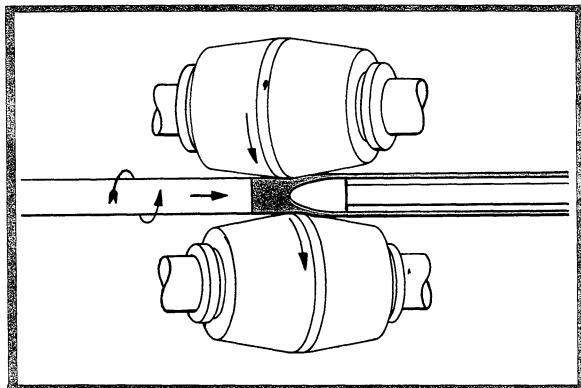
Piercing a steel billet to produce seamless forged tubing. *Courtesy Timken Roller Bearing Co.
